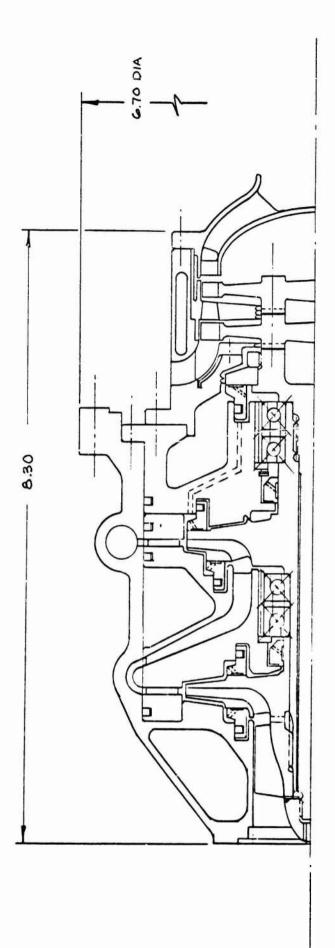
10K Fuel Turbopump Concept, V - Front-to-Back Shrouded Impellers - Bearings between Stages
